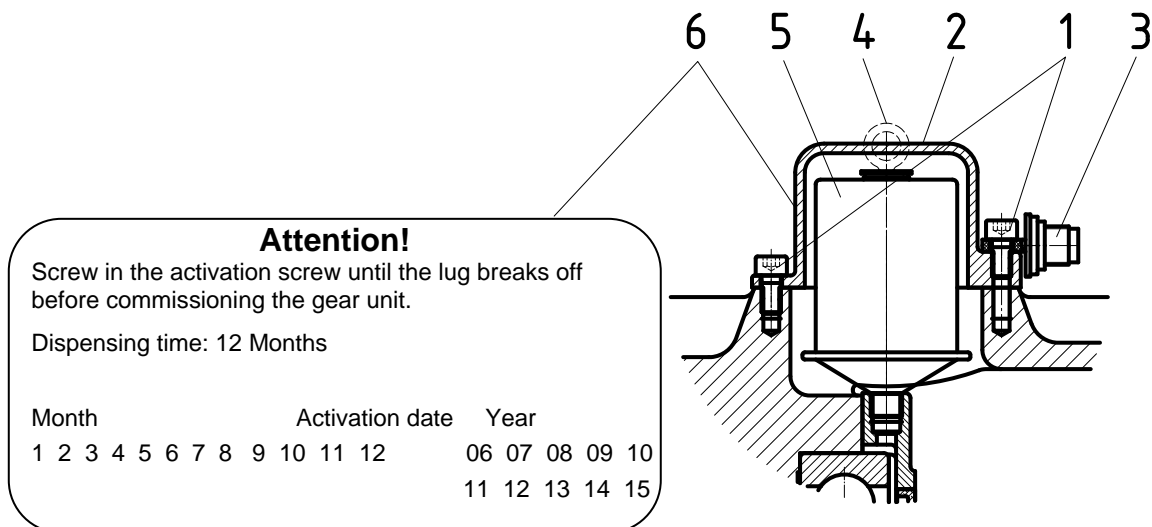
Activating the automatic lubricant dispenser with standard motor mounting
